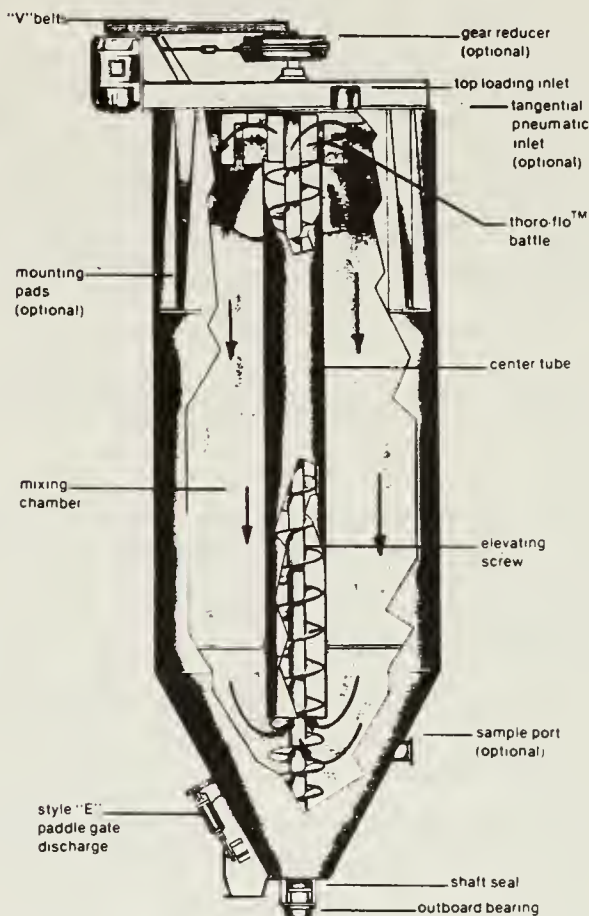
Construction and operating details of a vertical batch mixer. Source: Koppers Co., Inc.
